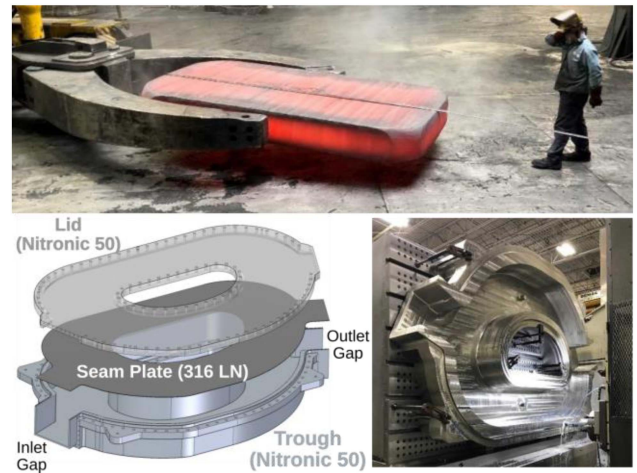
Final forging for the trough (top), the trough during intermediate inspection checks during machining (bottom right), and an exploded CAD rendering showing how the three pieces of the case (trough, cover, and seam plate) are assembled with gaps for the inlet/outlet plena.
